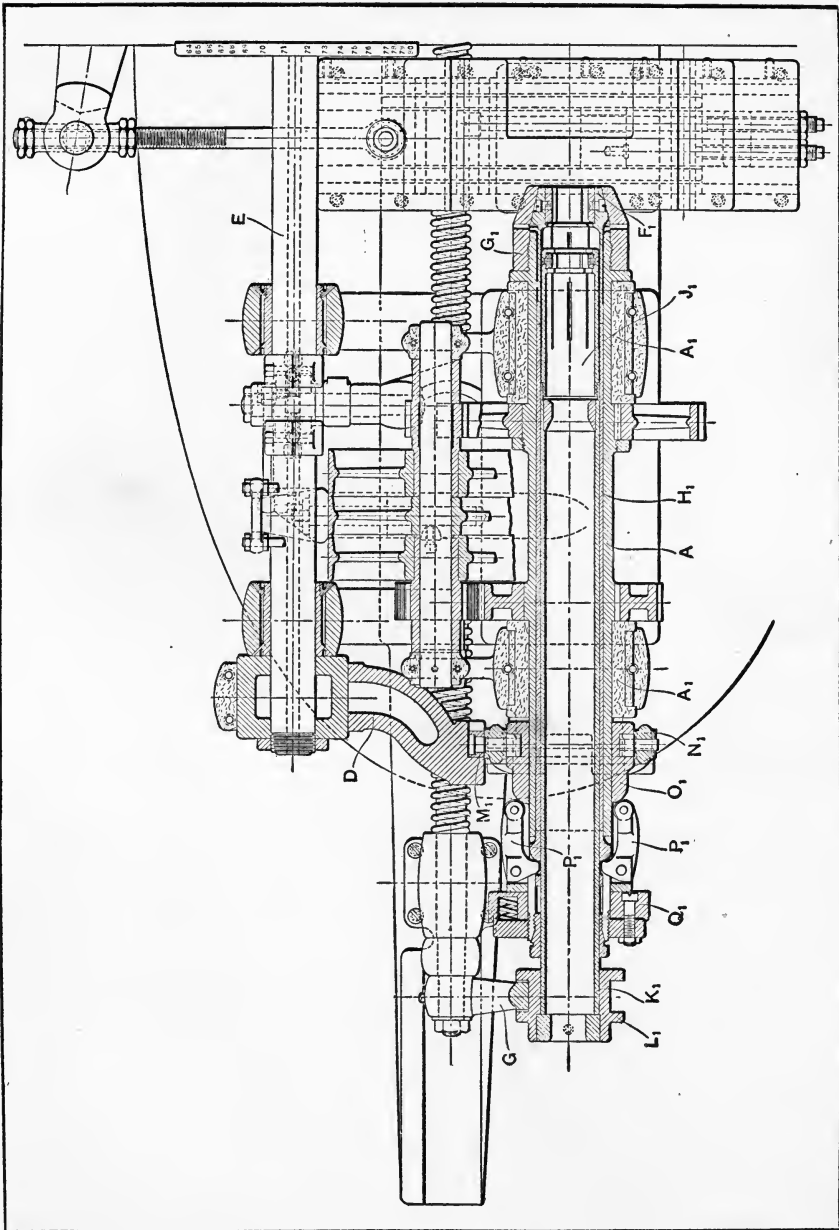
Sectional Plan View of Cleveland Machine showing Mechanisms for Driving Spindle, Feeding Stock, and Operating Chuck
